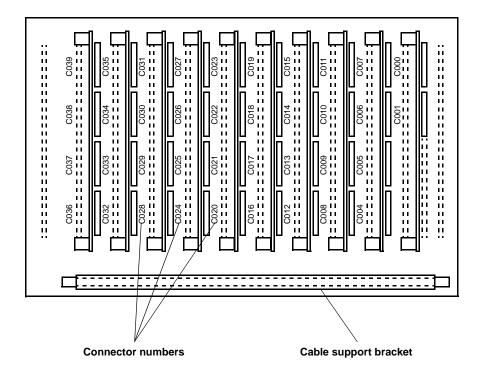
Connecting Plan - I/O Controller Shelf - NT1X61AD
